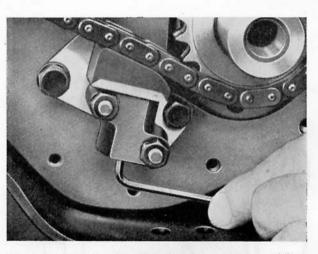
Releasing the chain tensioner slipper pad from the chain
